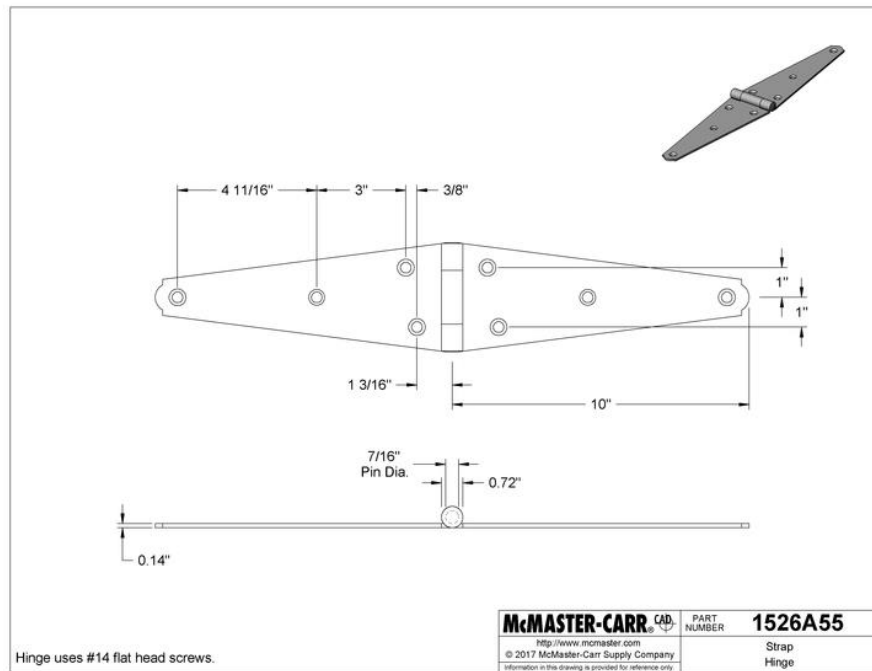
Dimensioned drawing of McMaster-Carr strap hinge used in the physical prototype.¹
